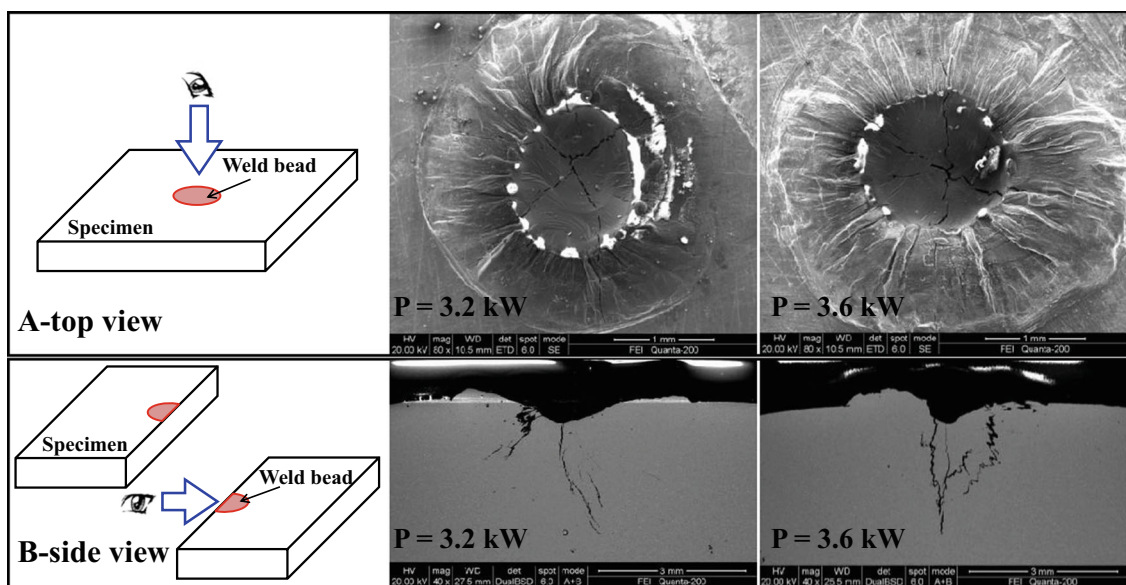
Effect of laser power on the cracking susceptibility in laser spot welding of 3-mm thick AA6063-T6 aluminum alloy. a top view; b side view
